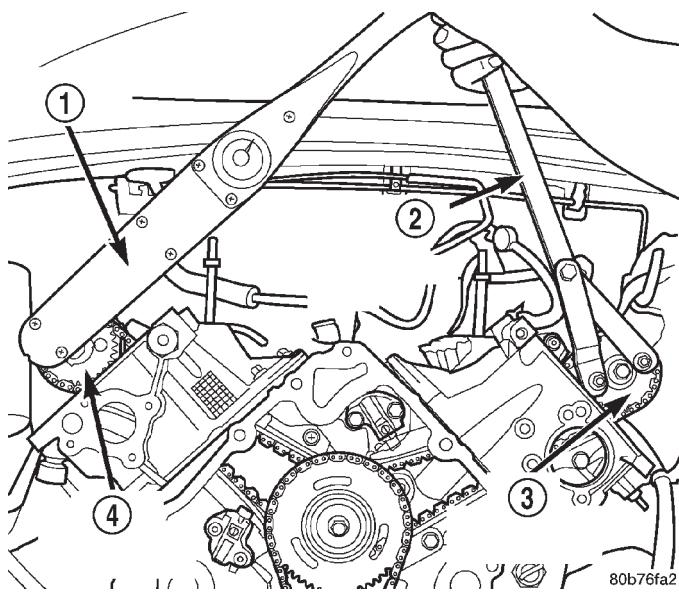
Camshaft Sprocket Installation—Right Cylinder Head
